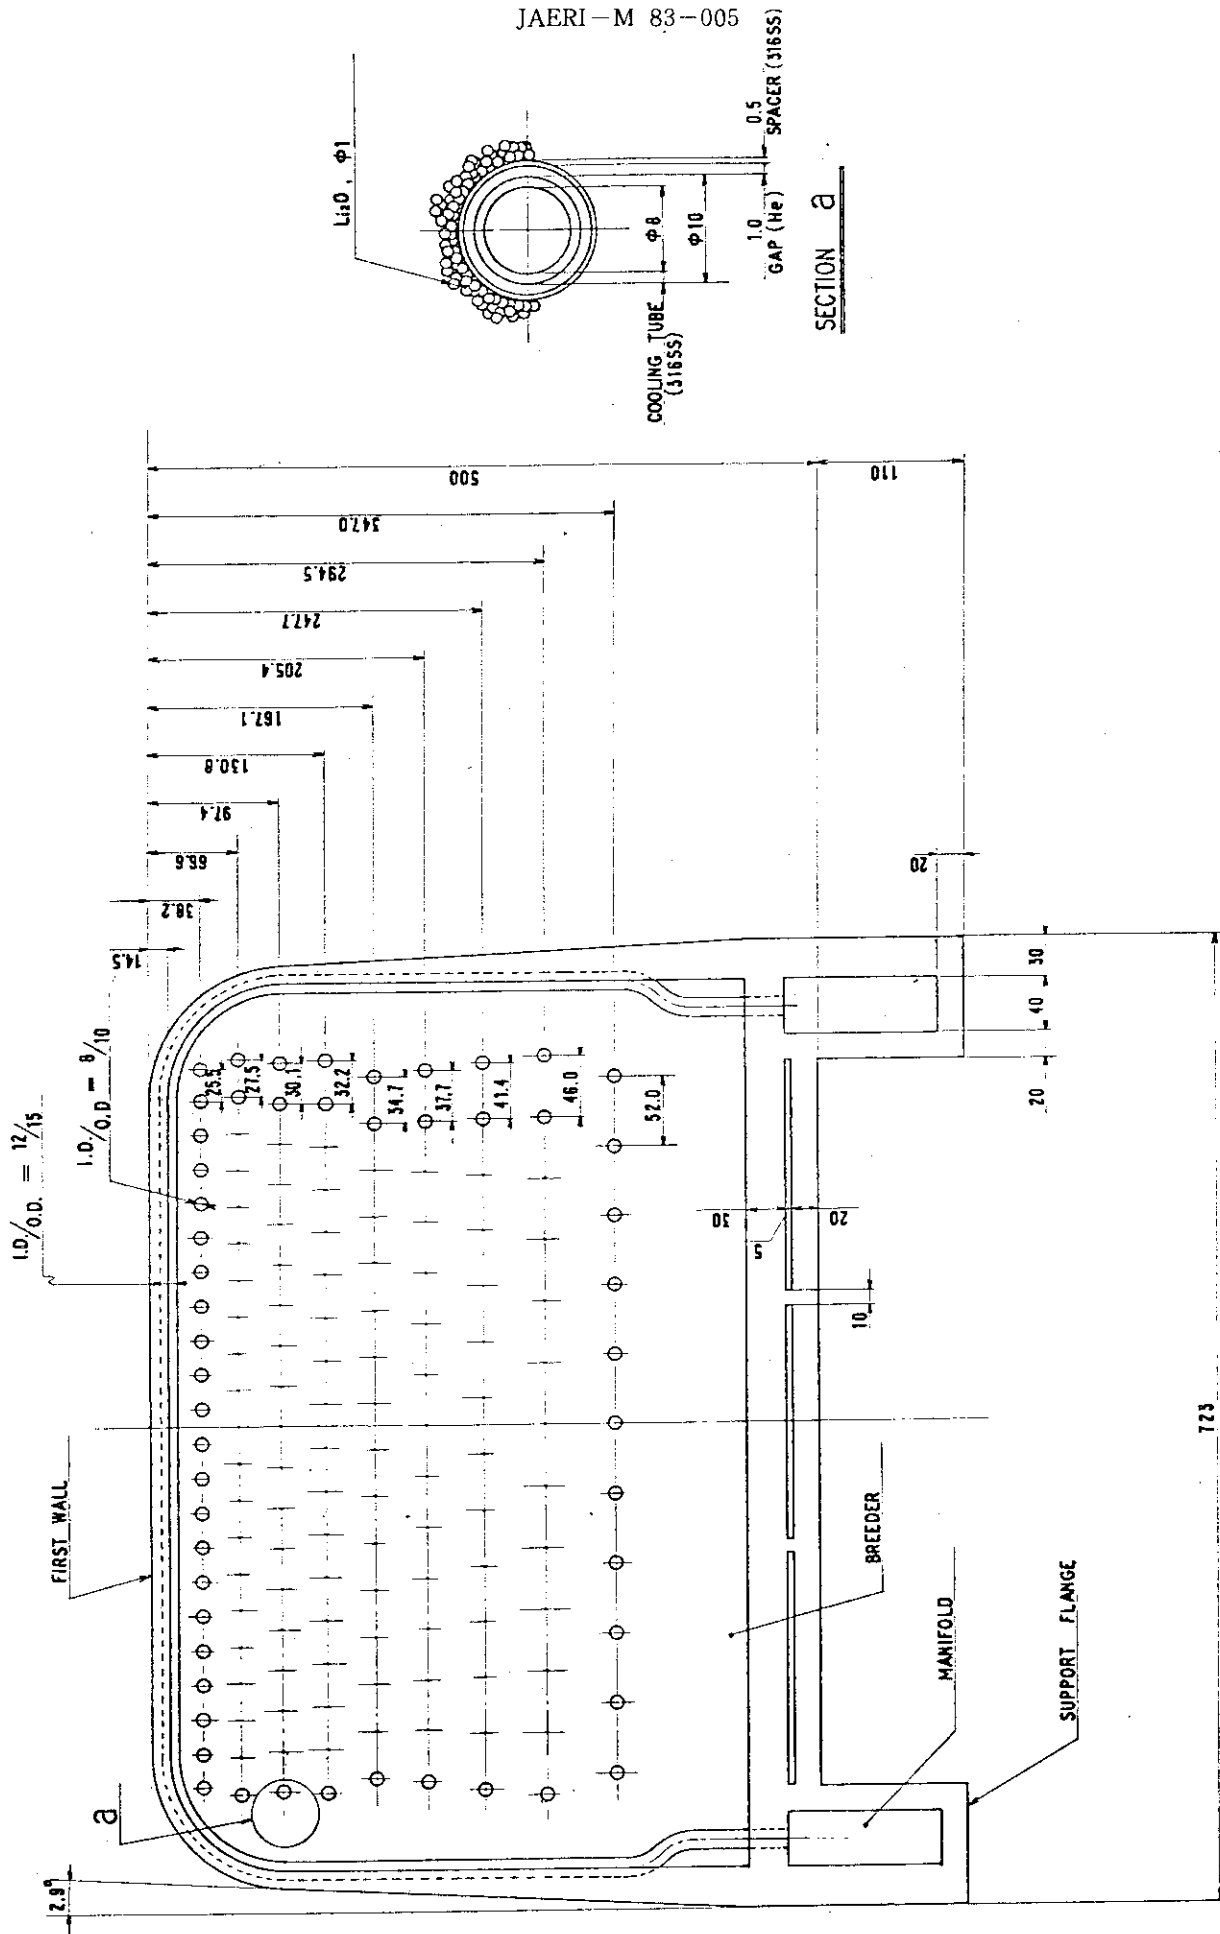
Cross-sectional view of outer blanket at the midplane
